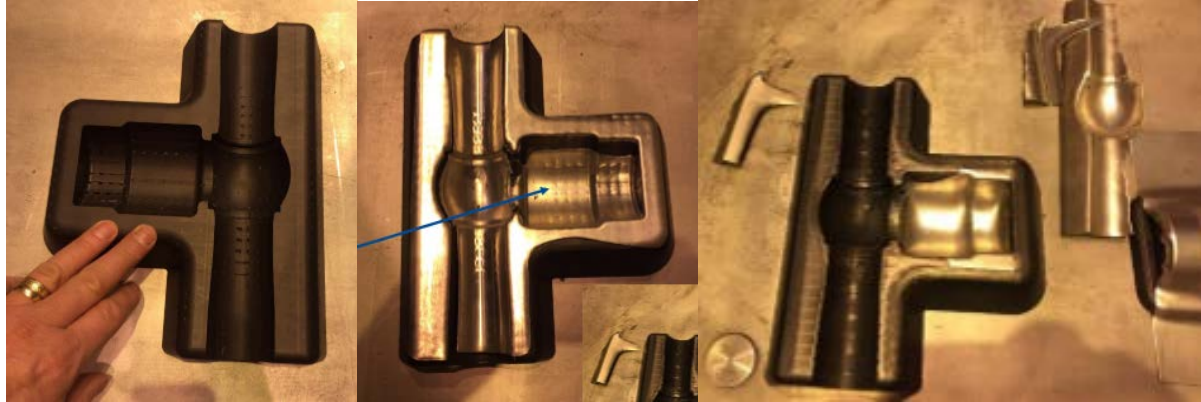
Female cavity/tool (left), results of 80 MPa test (center, with arrows to surface defects), and results of 15 MPa test (right) with 1mm blank thickness.
